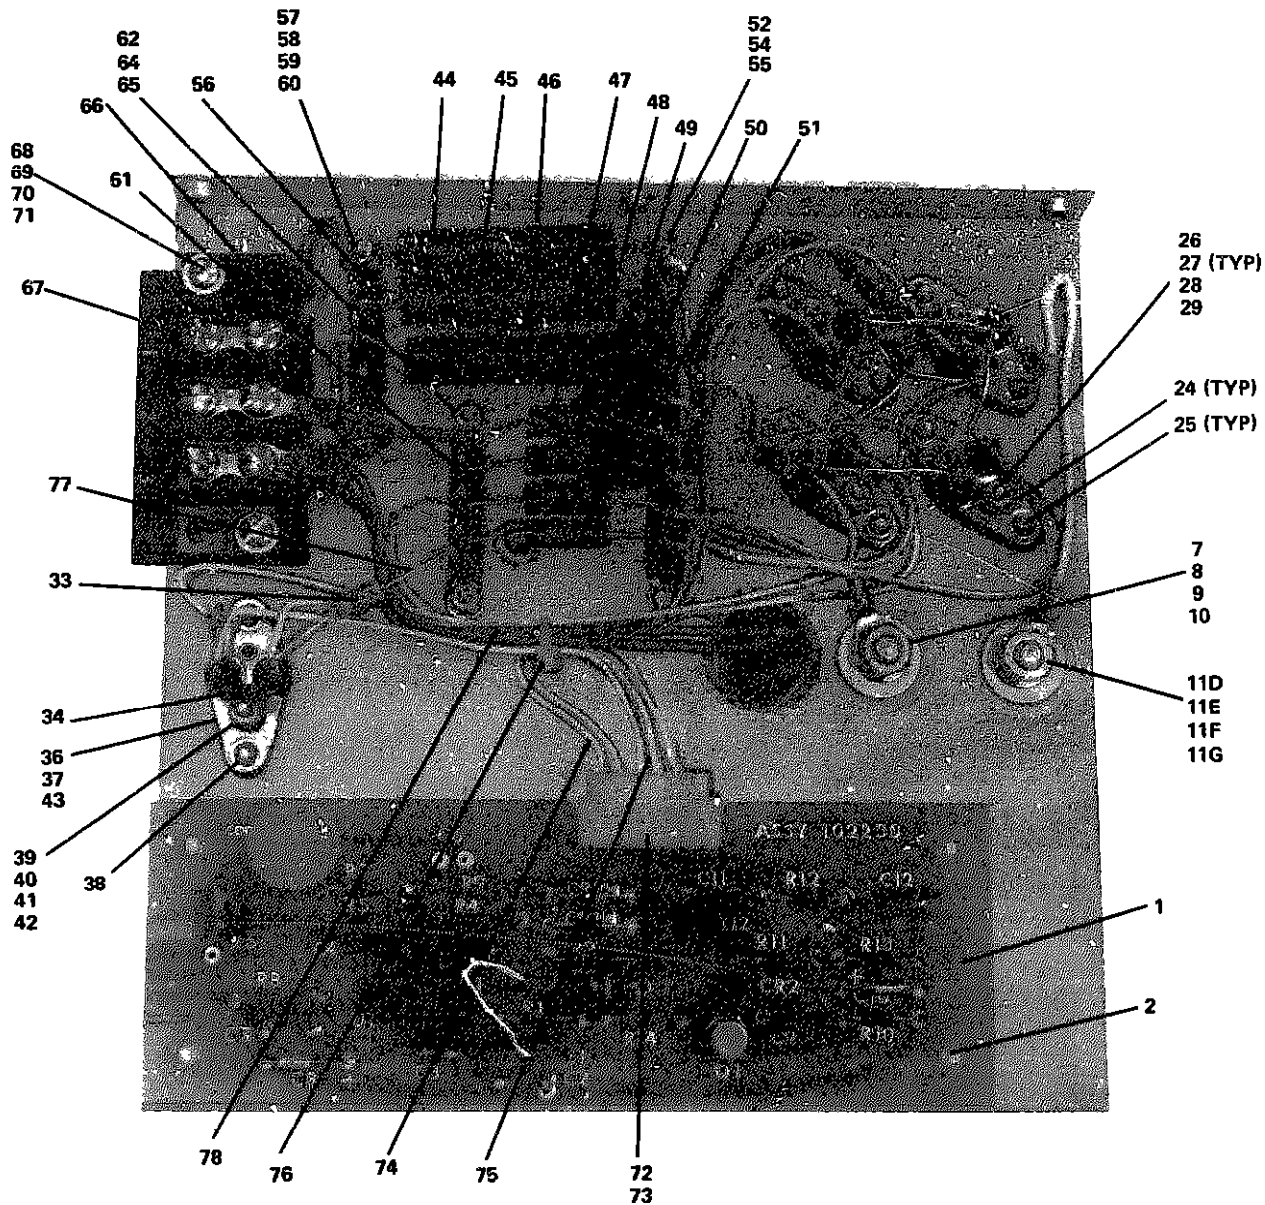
+5 Volt Power Supply Assembly Front 1A1A1 (Sheet 1 of 3)
